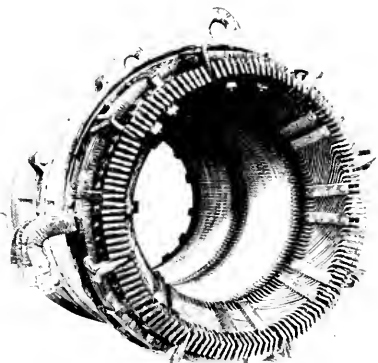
STATOR WINDINGS OF PHASE CONVERTER
